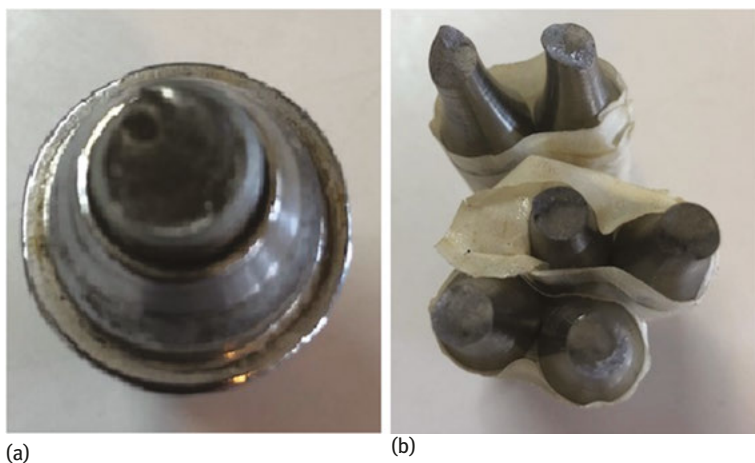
Cross section after fatigue failure: (a) wheel car bolt and (b) test specimens.
